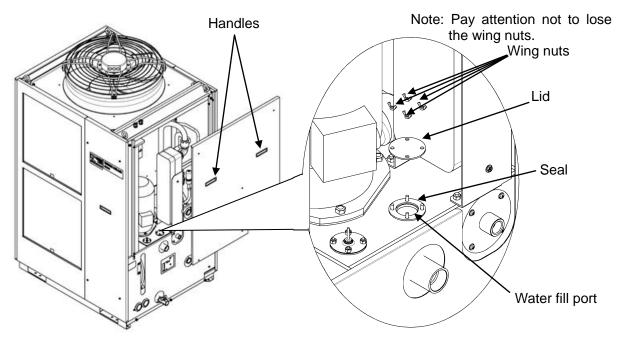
Removal of the right side panel and the lid of the water fill port
